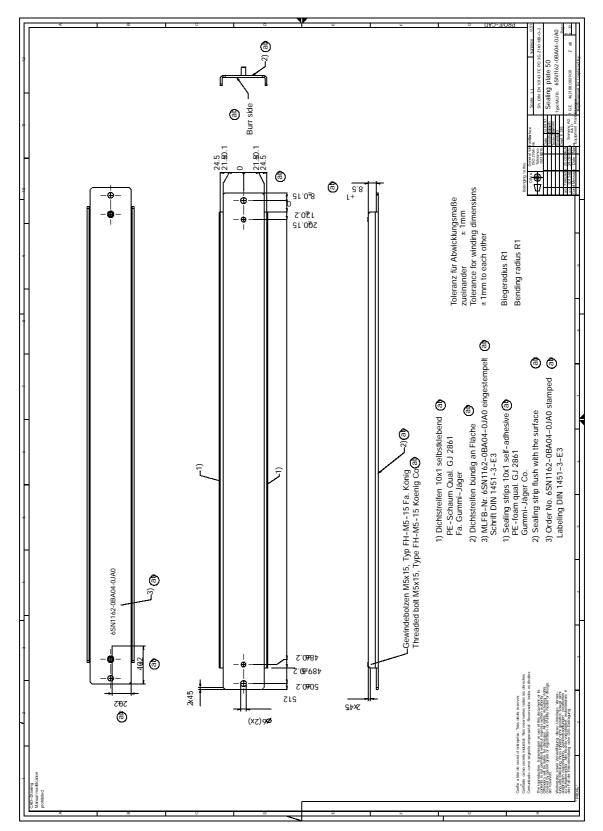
External cooling, mounting frame for cabinet installation module width 50 mm, 6SN1162-0BA04-0JA0
